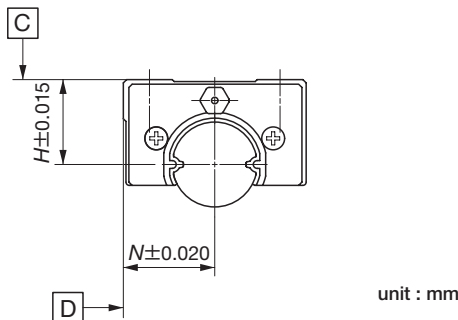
Accuracy of assembled set of Block type Linear Ball Spline
